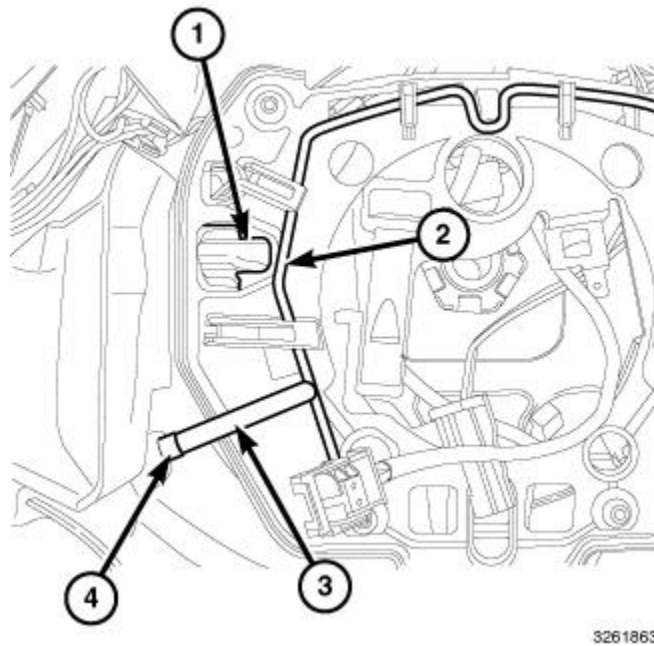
Special Tool, Groove, Retainer Spring & Hook
